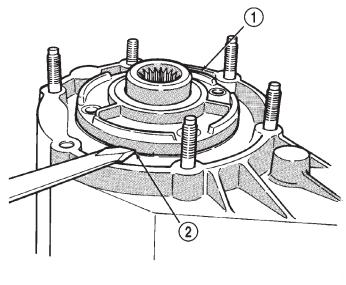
Sector Bushing And O-Ring Removal 1 – SHIFT SECTOR BUSHING 2 – O-RING
